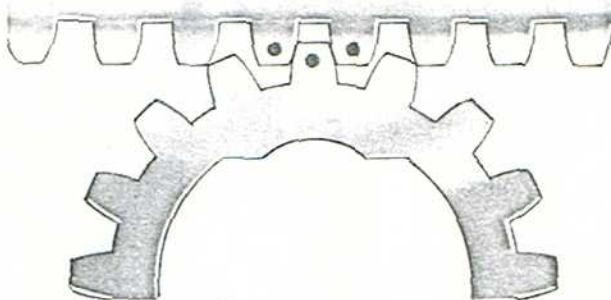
Location Of Timing Marks On Injector Rack And Gear
